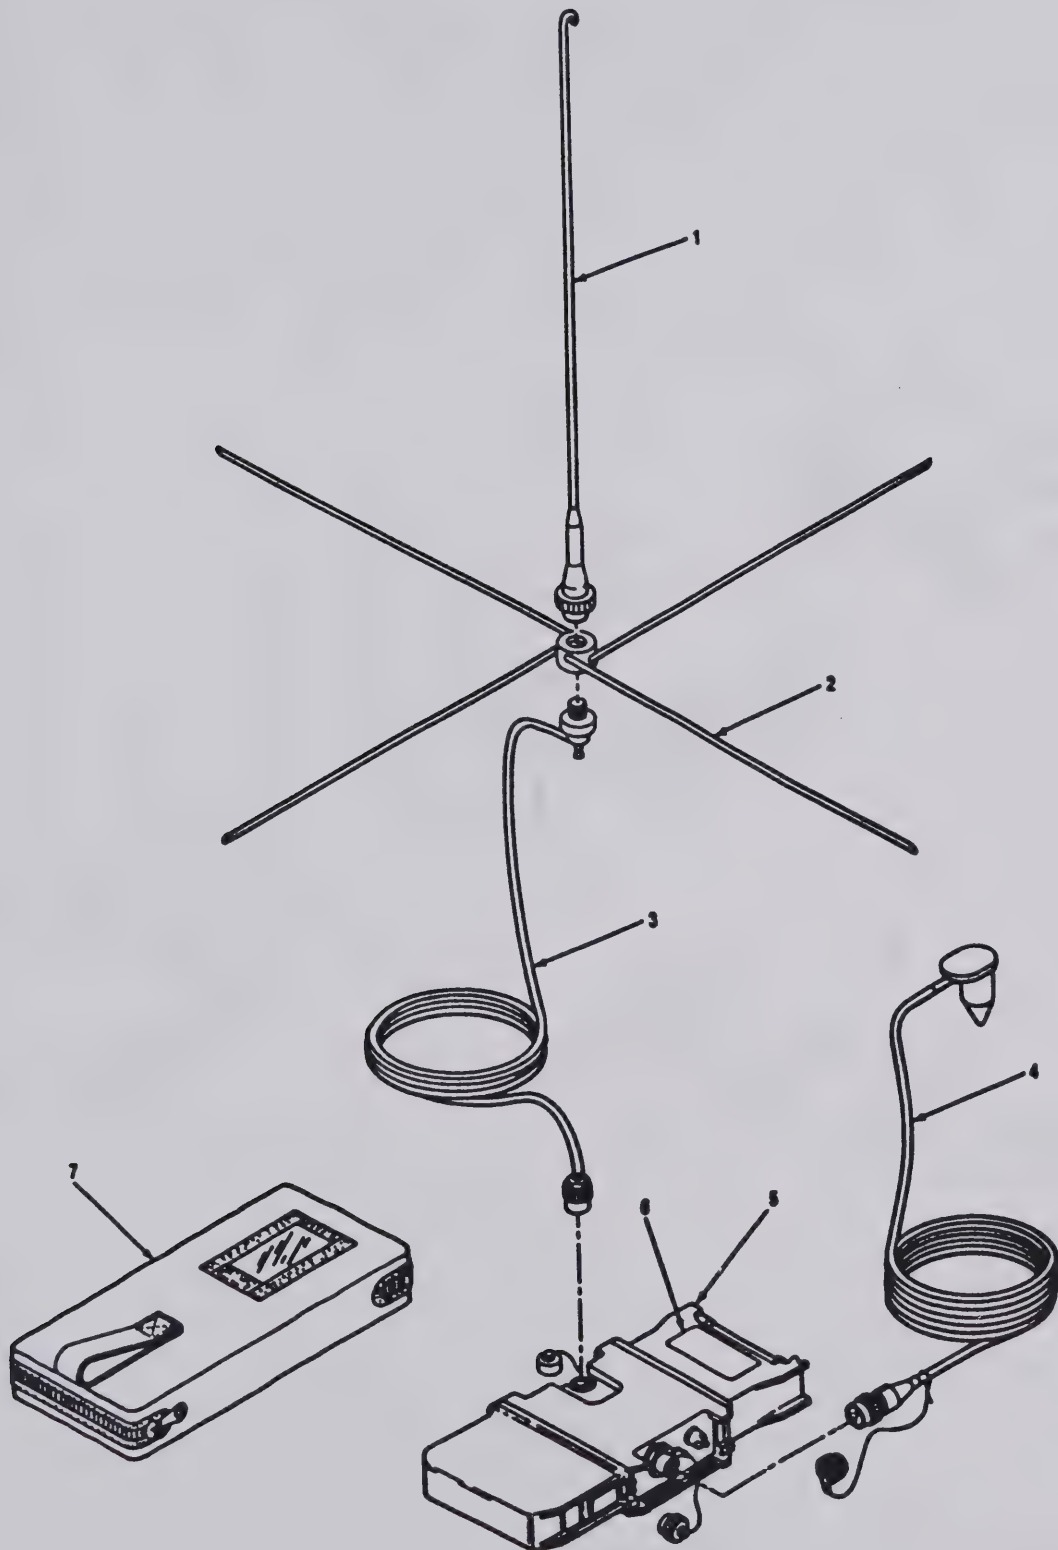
Sensor Set, DT-562A/GSQ (Sheet 1 of 2)
